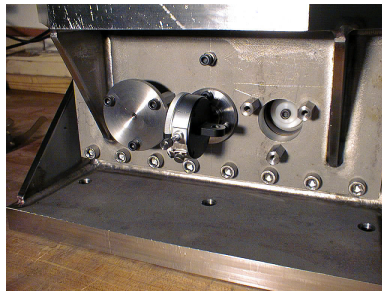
standoffs, spring and back-plate being installed; the stop screws must be holding the flexures locked during this step.
